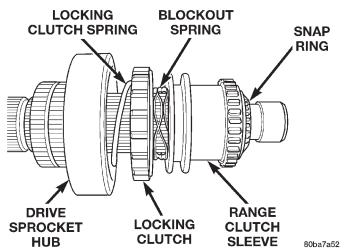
Range Clutch Sleeve, Blockout Spring, Locking Clutch and Spring
